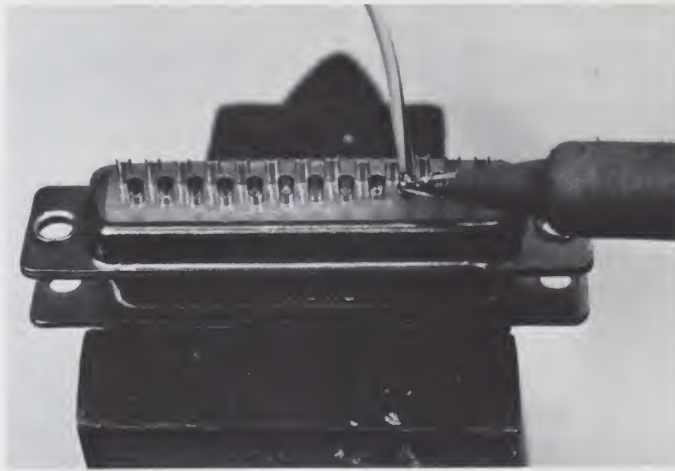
Insert the wire into the connector. Avoid excessive and prolonged heat to prevent damage to the connector.
